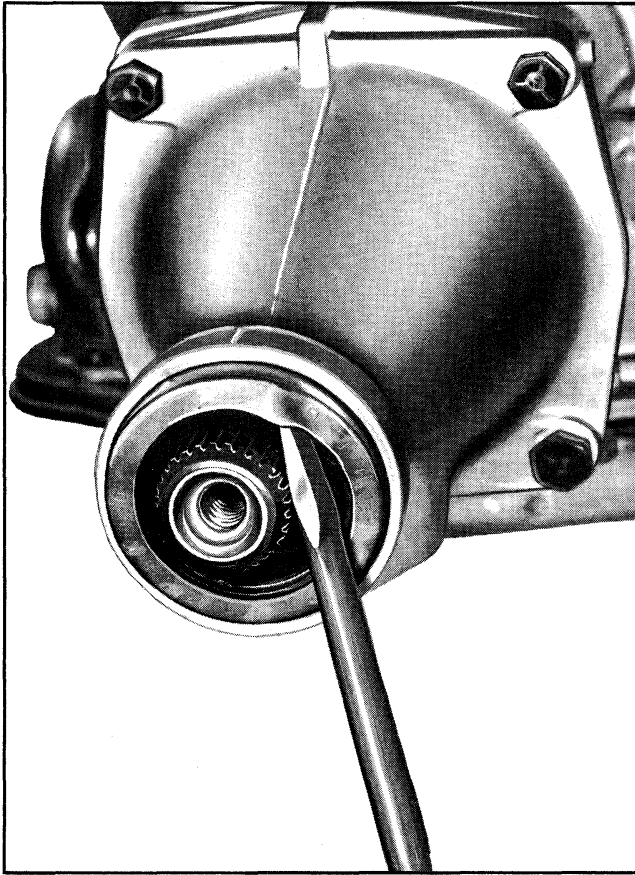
B-30 Removing Rear Bearing Retainer Oil Seal
